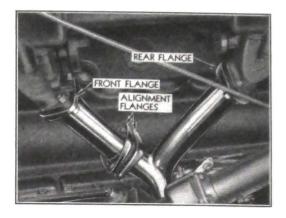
Exhaust Pipe—Compound Carburetion
